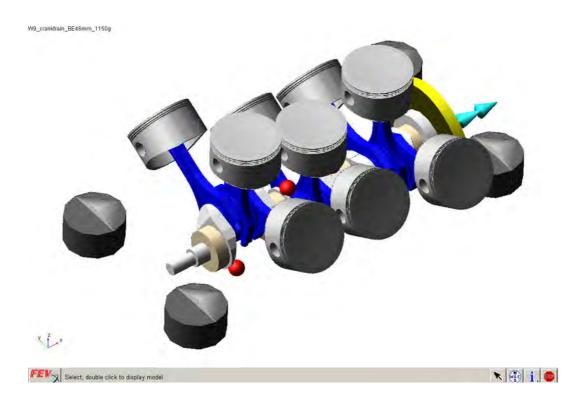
W-9 crank train assembly from ADAMS/Engine.
